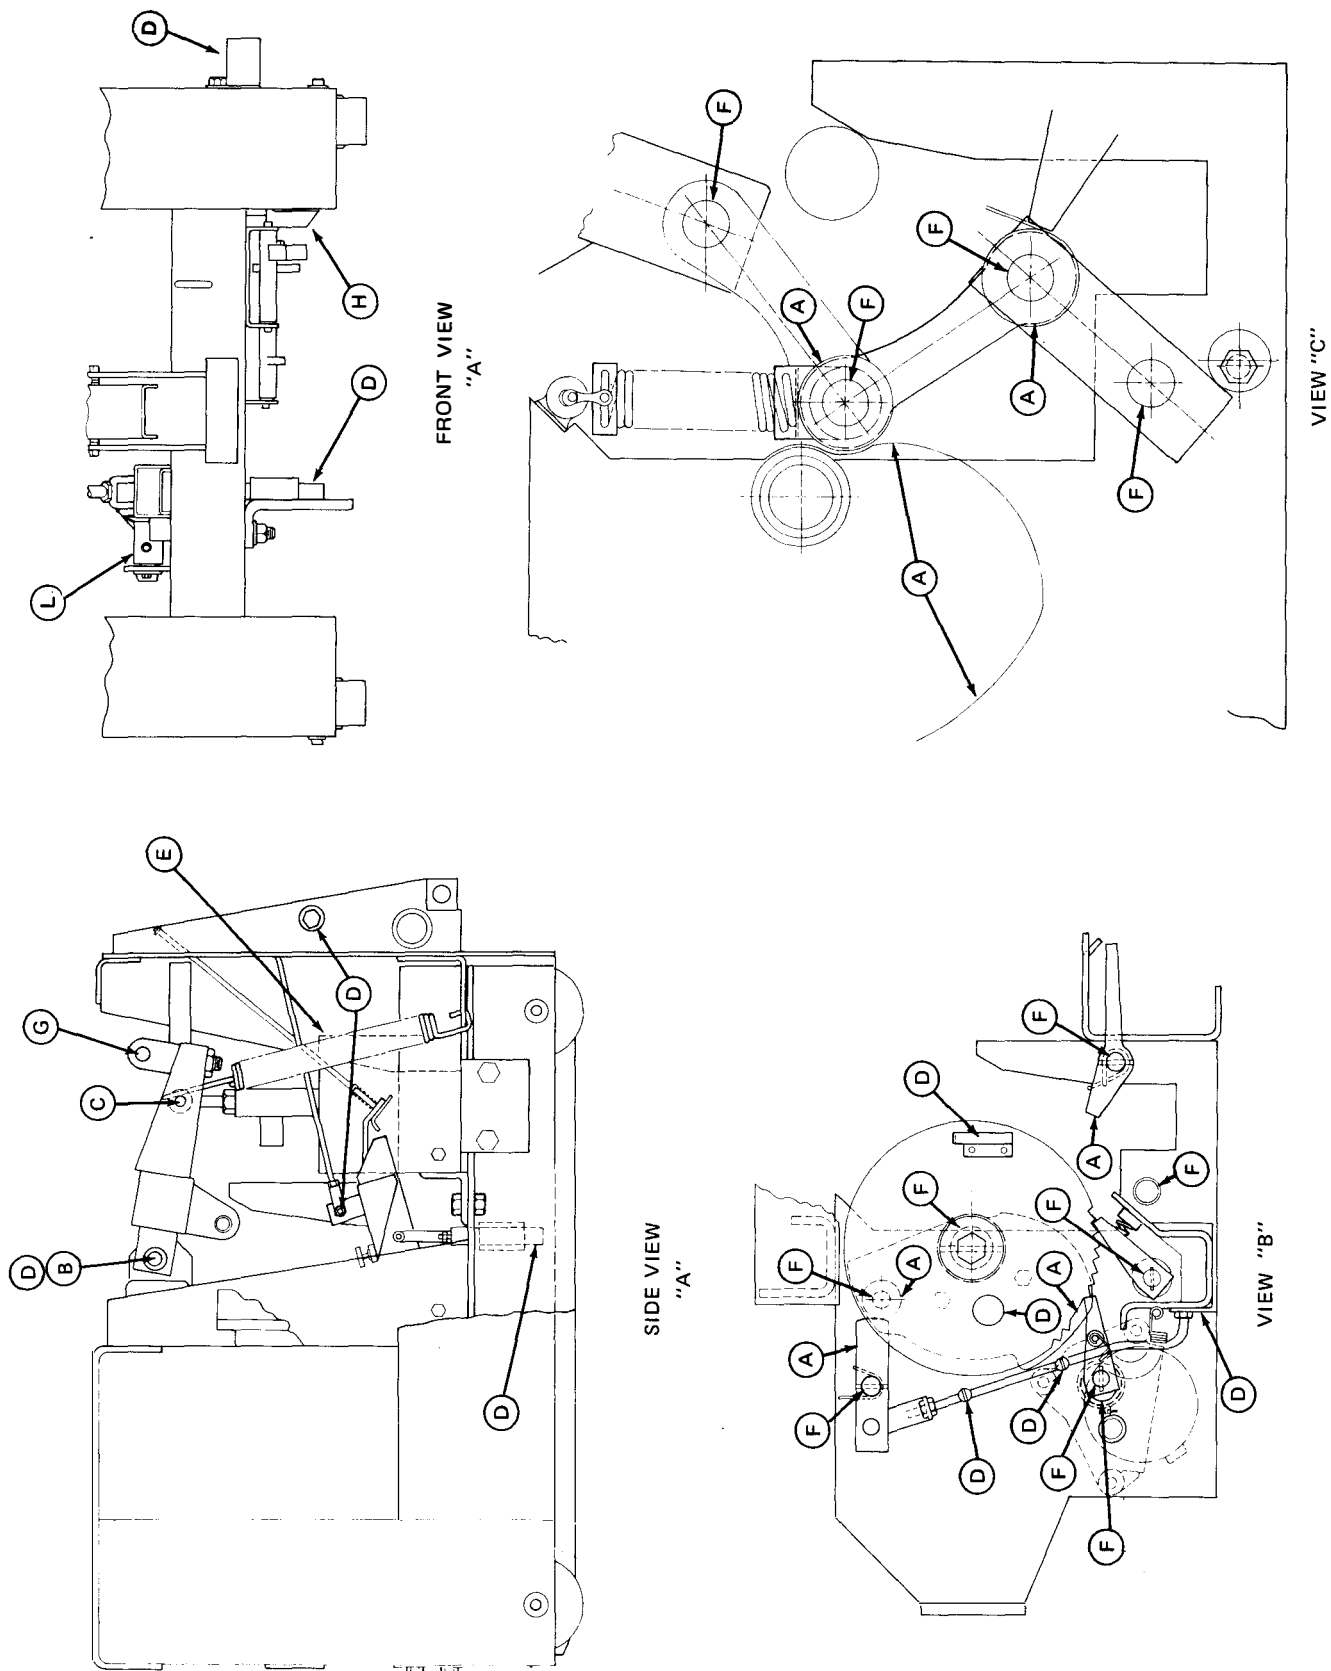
Frame and Operator, Drive Assembly, and Linkage Assembly
